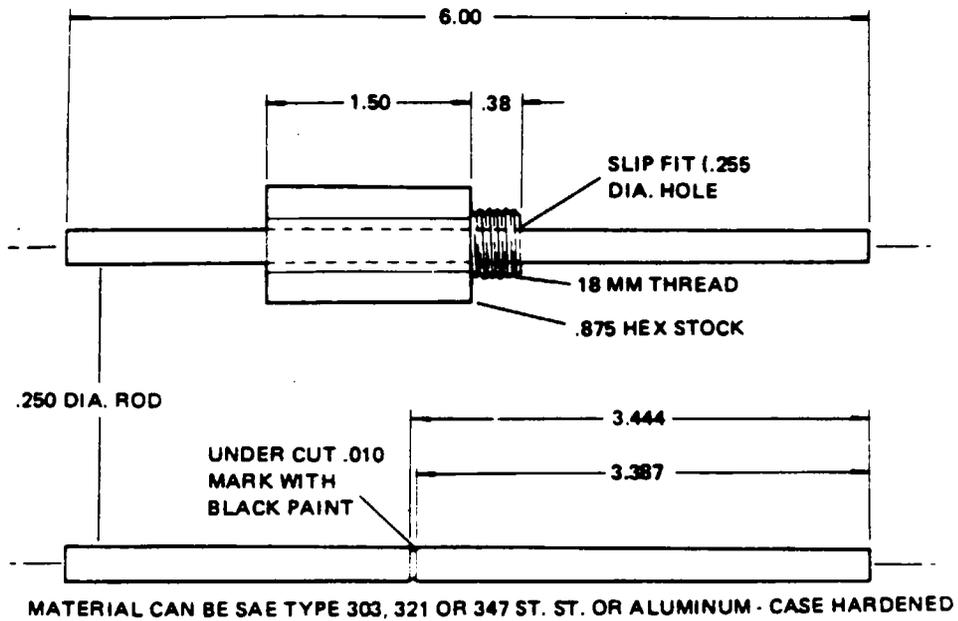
Spark Plug Fixture (Janitrol Heater)
